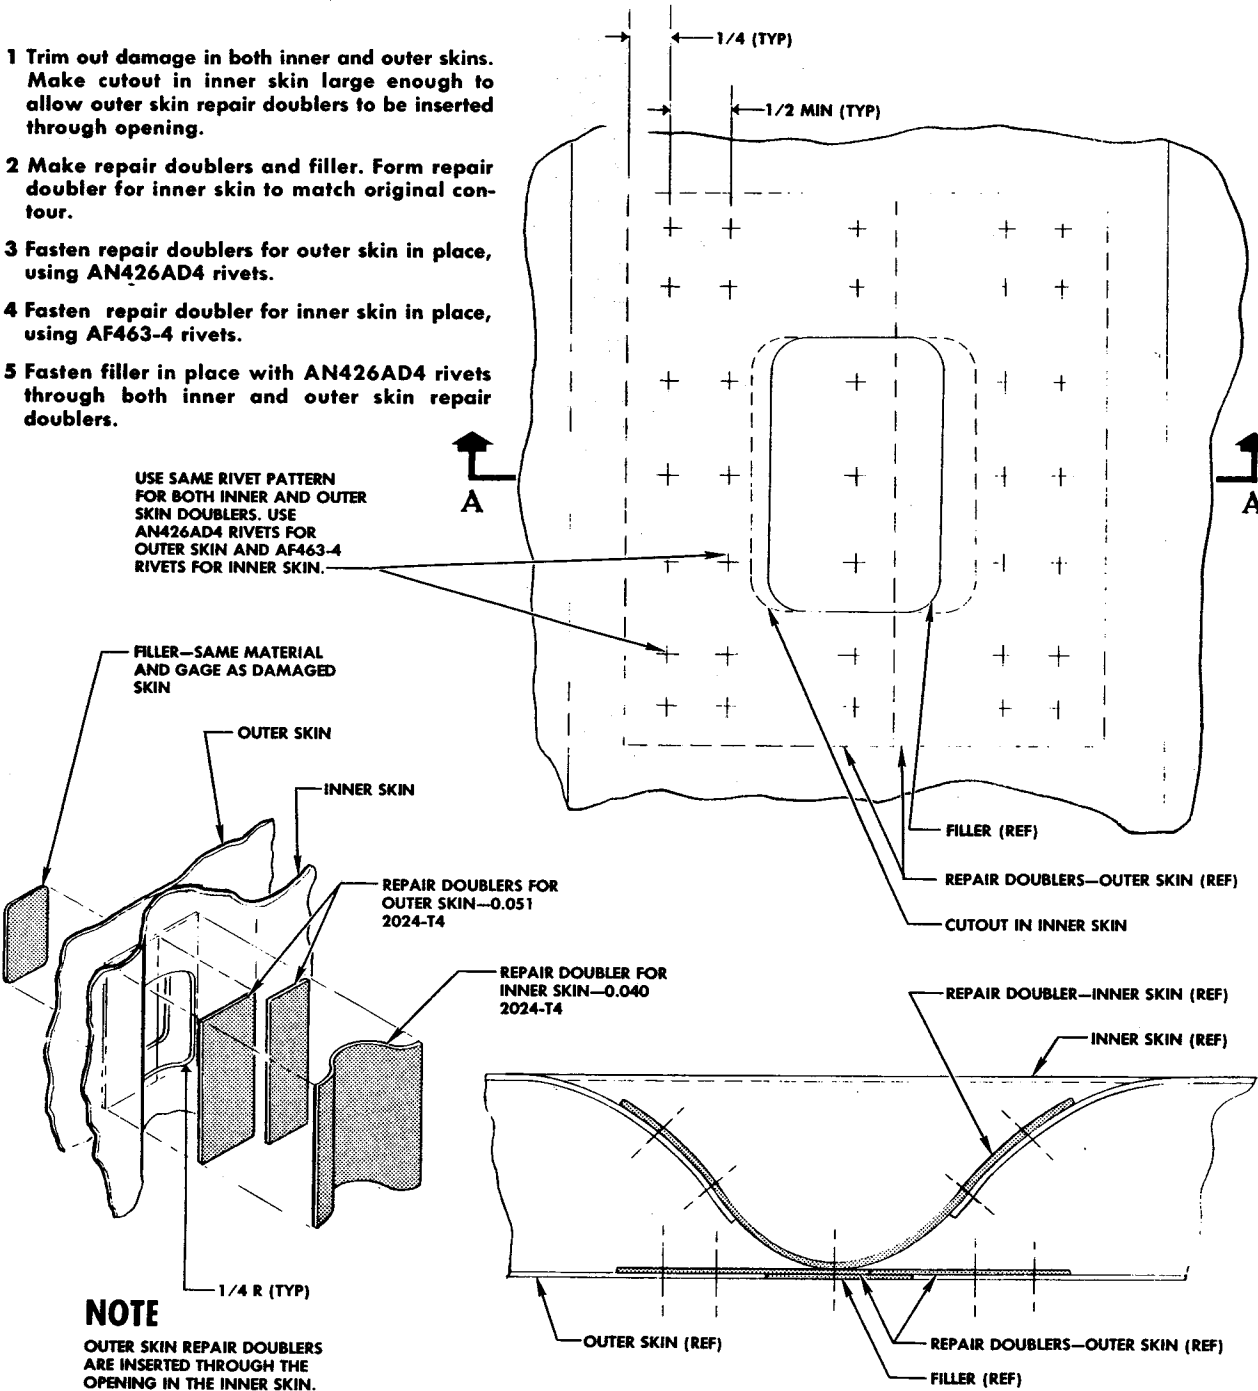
A. Waffle Repair Landing Gear Doors (Sheet 1 of 2)
